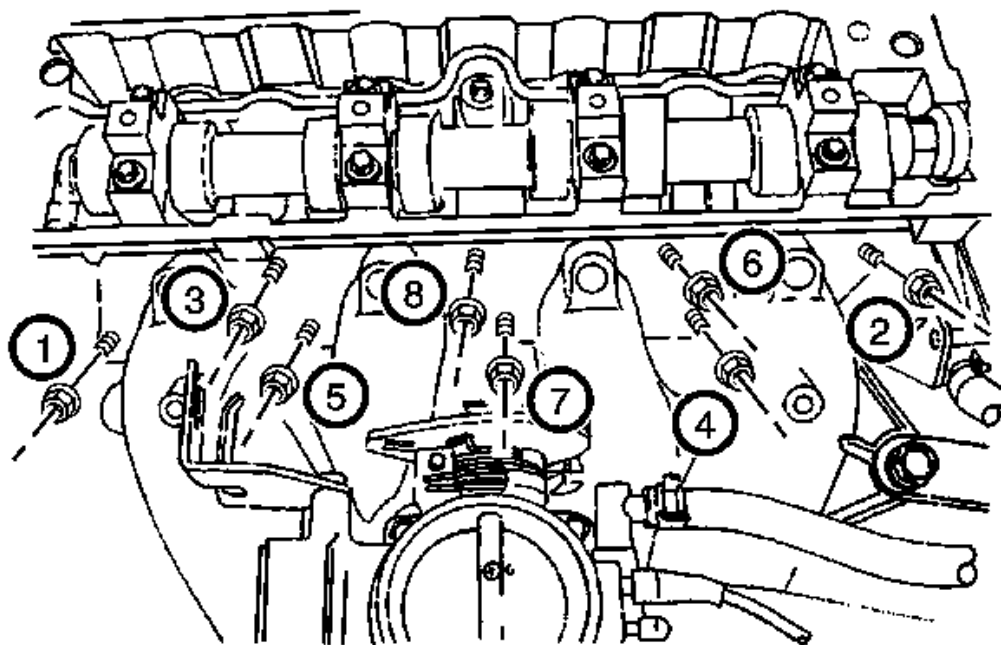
View Of Intake Manifold Retaining Bolt Removal Sequence
